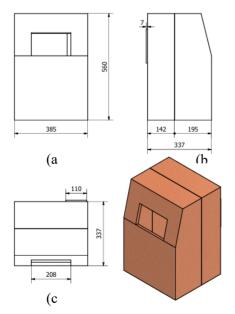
Main views of the assembled housing. (a) Front View, (b) Side View, (c) Top View
